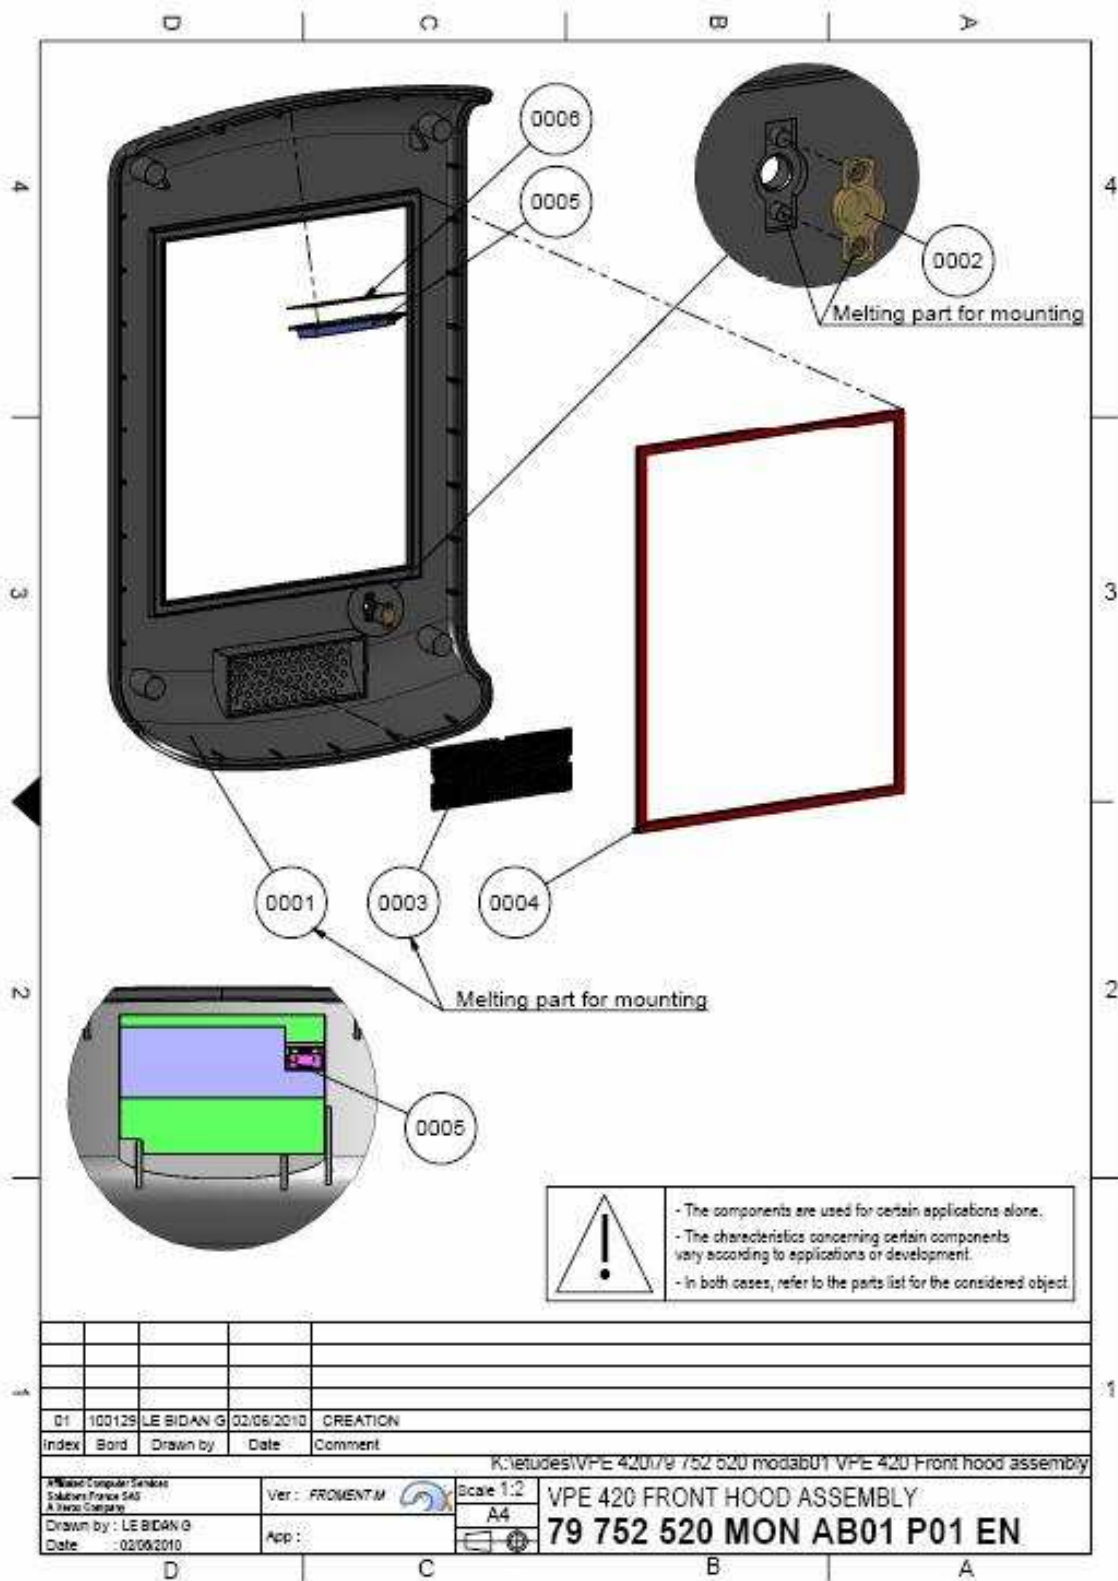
Dismantling/mounting – VPE 420 Front hood assembly
